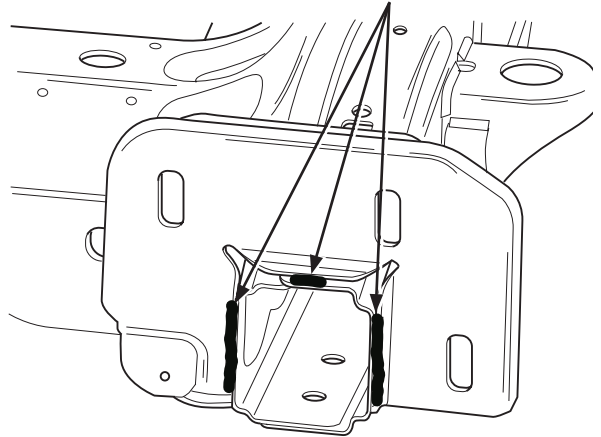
GRIND WELDS SHOWN TO REMOVE DAMAGED BUMPER BRACKET, DO NOT GRIND INTO THE FRONT FRAME HORN MATERIAL WHEN REMOVING THE BUMPER BRACKET FROM THE FRAME, RH SHOWN, LH SYMMETRICALLY OPPOSITE
